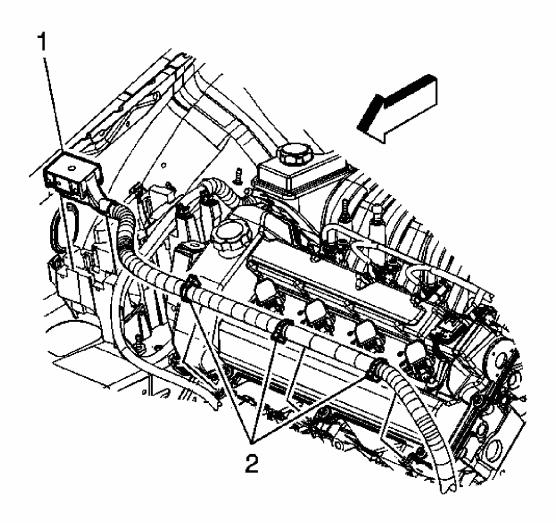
View Of Engine Harness & Clips Courtesy of GENERAL MOTORS CORP.
